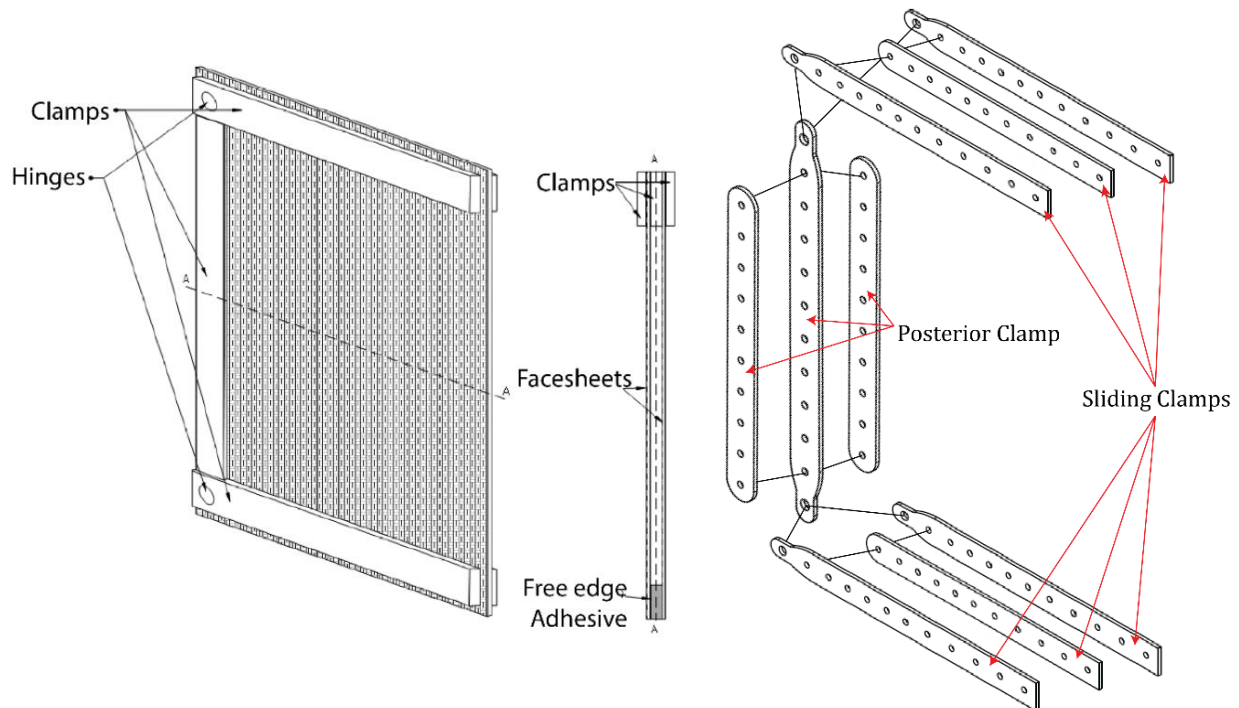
a) Preliminary hinged clamp design for adhesive bonded joint plates for buckling tests. b) Exploded view of CATIA clamp elements. Full details found on Appendix E.
